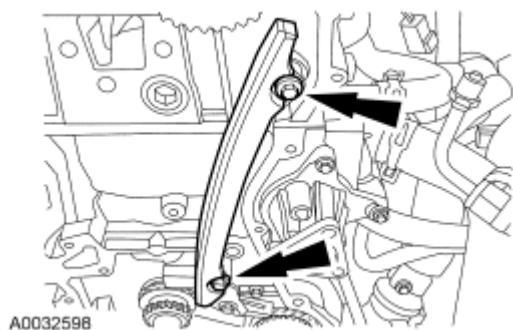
Identifying Bolts And LH Timing Chain Guide
